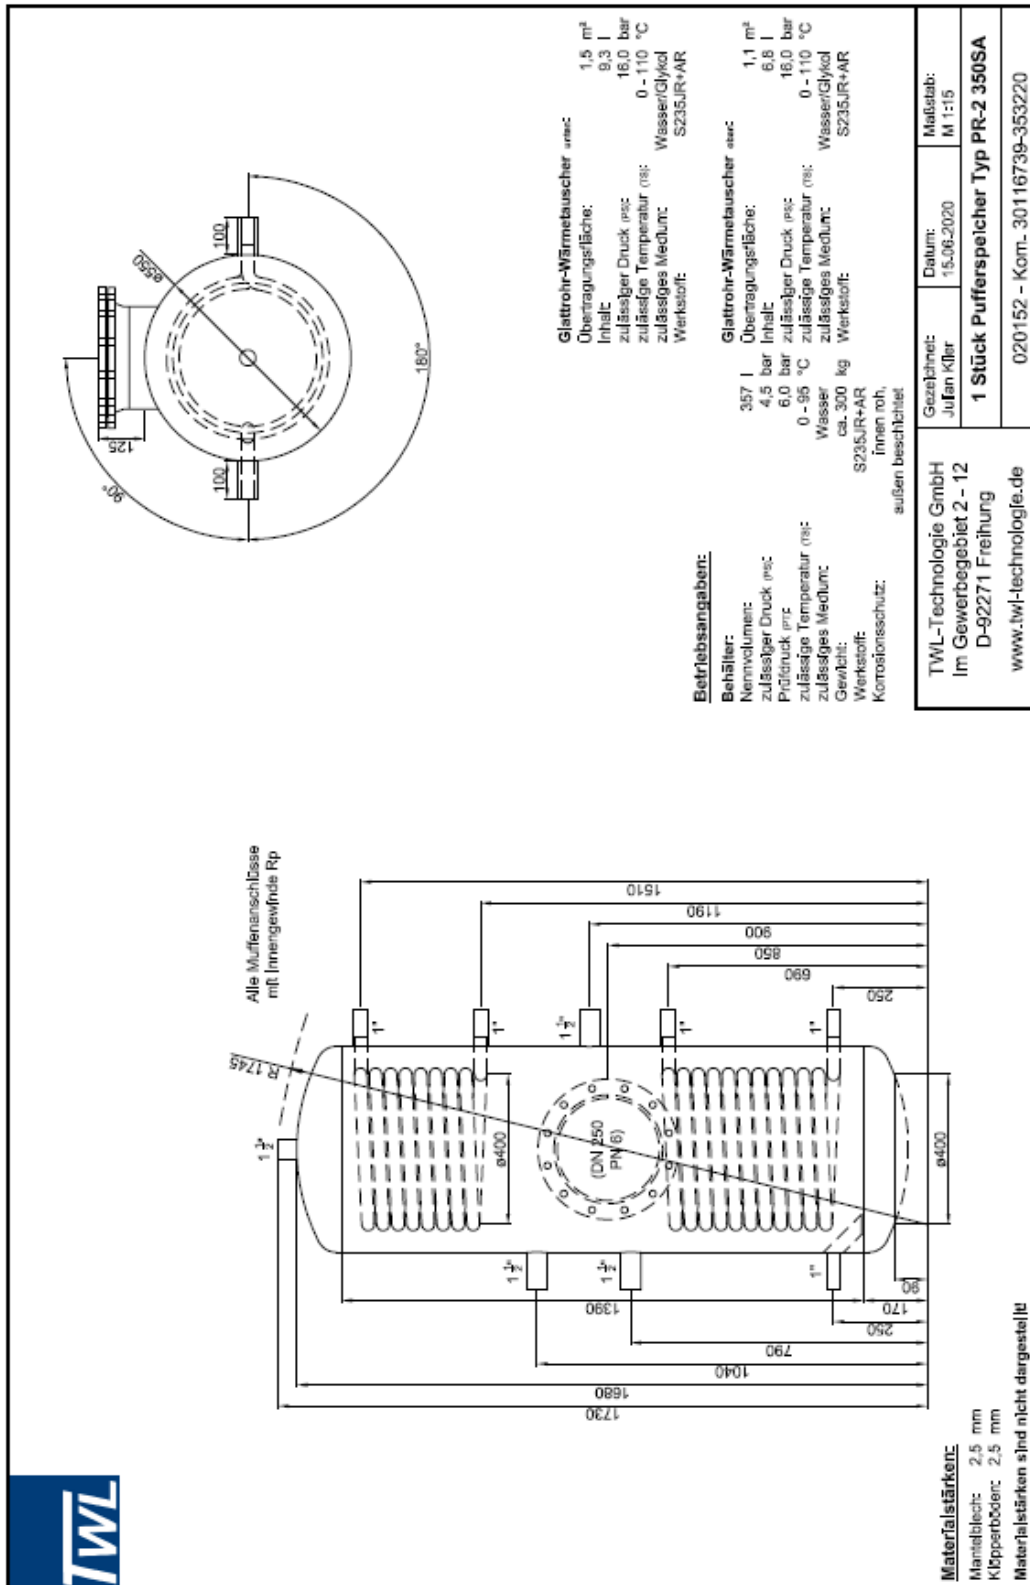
Technical drawing of the storage tank, made by the supplier TWL.
